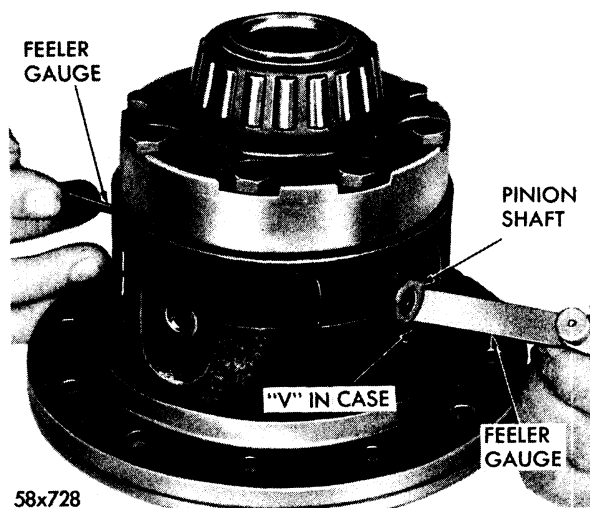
Checking Clearance between Pinion Mate Shafts and "V" in Case
